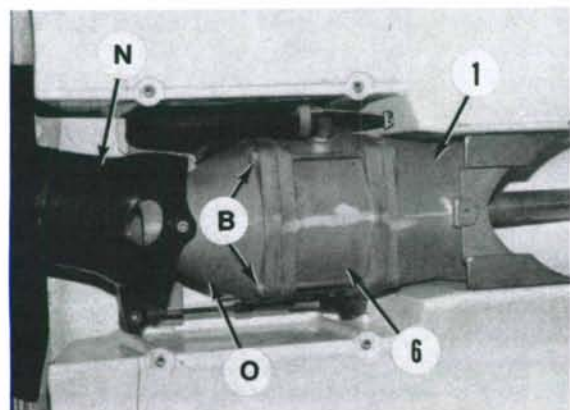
On JS550 models, jet pump inlet housing (1), vane housing (6) and outlet nozzle (O) are held together by four through-bolts (B), two on top and two on bottom. Steering nozzle (N) pivots on outlet nozzle (O).
